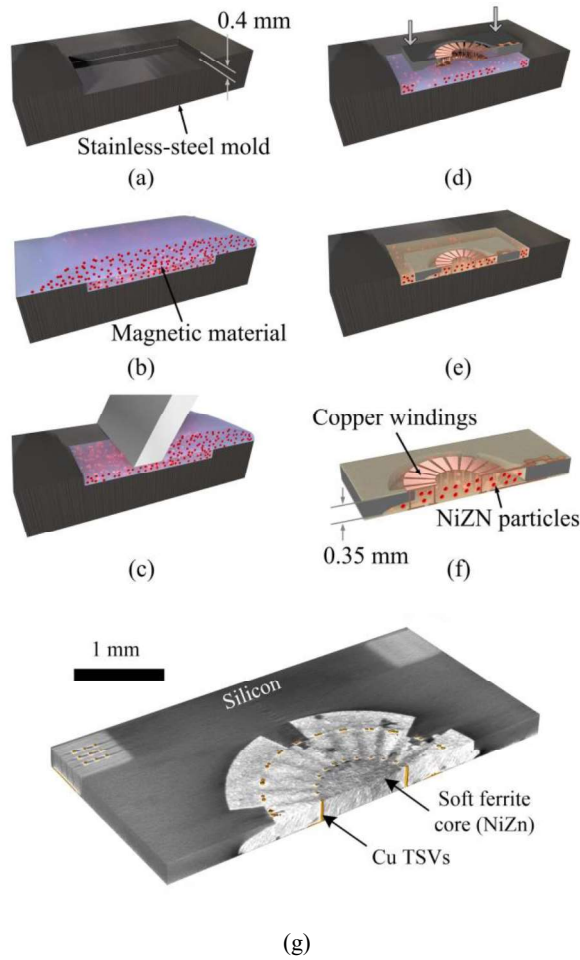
A manual casting process for magnetic core fabrication. (a) Step 1: a stainless-steel mold with a 0.4-mm-deep, 6 x 6 mm cavity, (b) Step 2: casting of the composite material into the mold, (c) Step 3: a planarization step is done to get a uniform composite layer with a thickness of 0.4 mm. This is designed to be  $50\text{ }\mu\text{m}$  higher than the inductor thickness of  $350\text{ }\mu\text{m}$  to avoid overfilling of the core material over the copper windings. (d) Step 4: immersing of the air-core inductor into the composite layer, (e) Step 5: the core is cured at  $75\text{ }^{\circ}\text{C}$  for 3 hours, (f) Step 6: the inductor is released from the mold. (g) A cross-sectional micrograph
